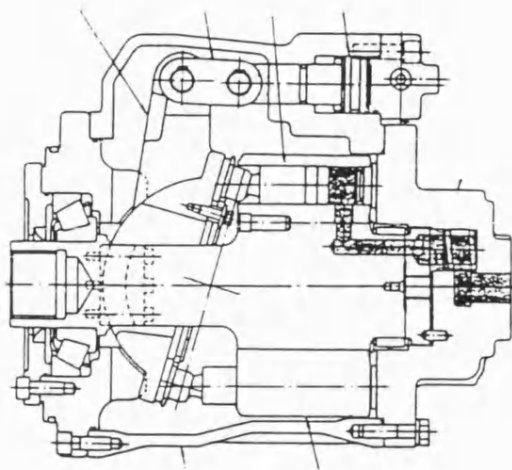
TOSHIBA AXIAL PISTON MOTOR
